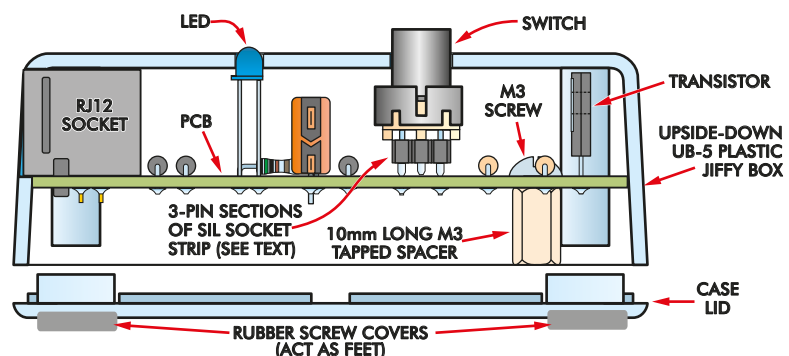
this diagram shows how it all goes together. The two switches are not soldered to the board, but mounted inside some cut-down DIL sockets. This gives them some 'play', making the board easier to fit in the case.
